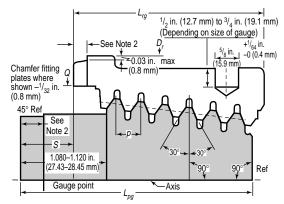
Working Thread Gauges<sup>3</sup> Rotary Shouldered Connection All Sizes and Styles
